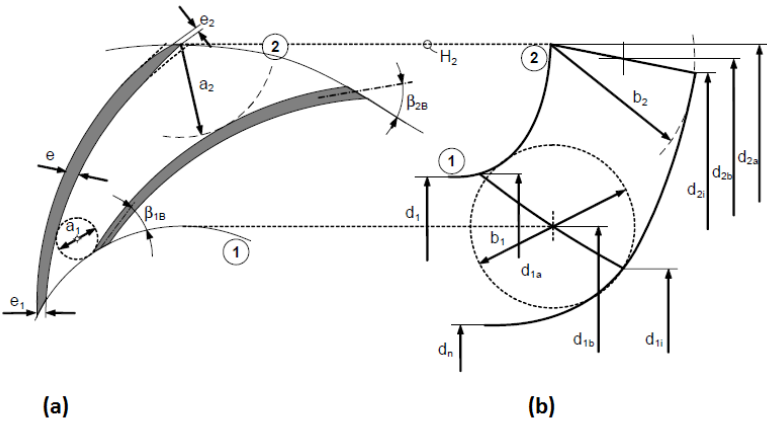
Geometric profile and dimensions of the radial impeller (a) plan view, (b) meridional view, [6]
